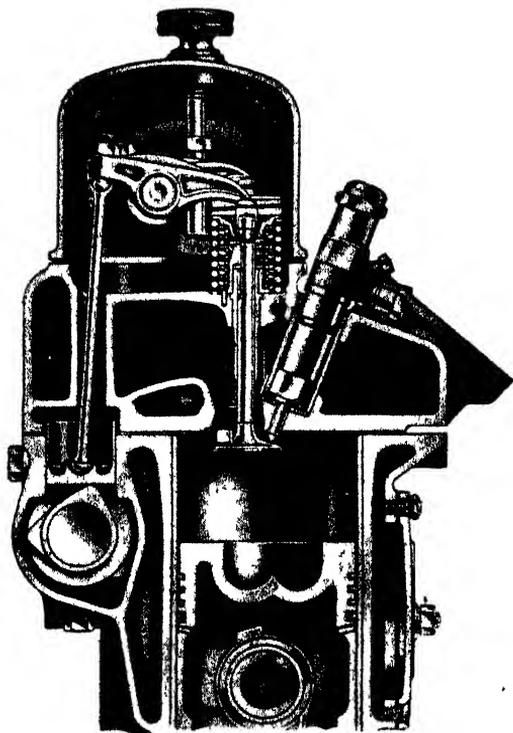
Cylinder Head of the A E C 7 7-litre 6-cyl. Direct-ignition Oil-engine
